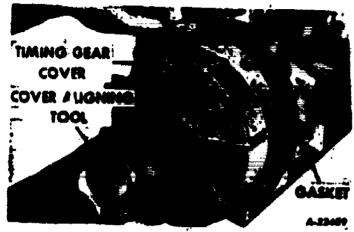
Aligning Timing Gear Cover with SE-1717 Aligning Tool
